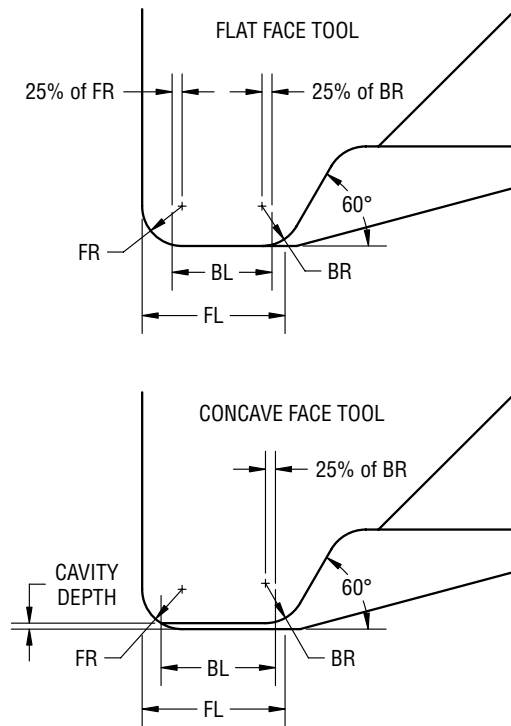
& 11 – Bond foot dimensions of a flat face and concave wedge
